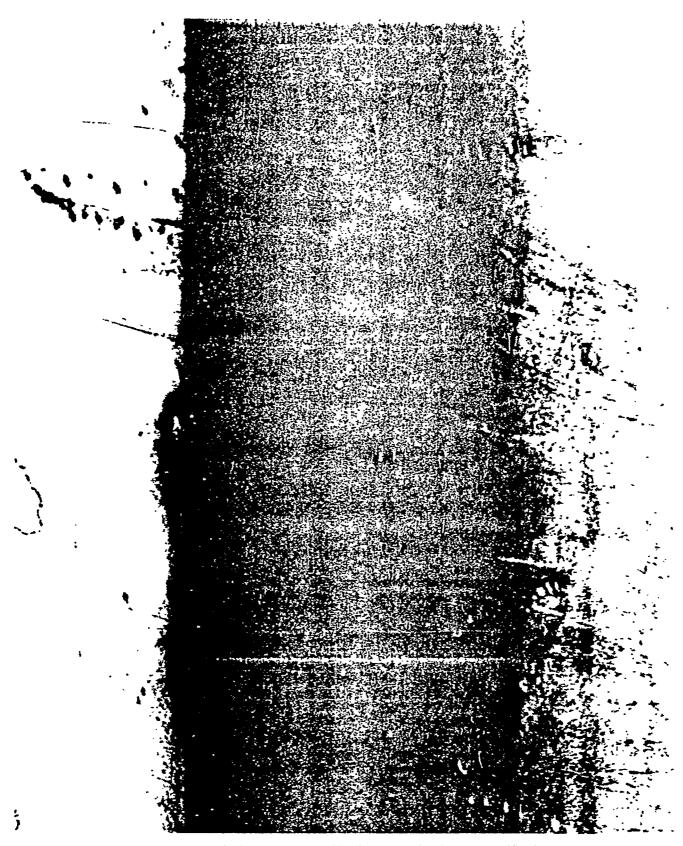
Typical Master Butt Weld Prior to Repair. (0.67:1 Magnification)
